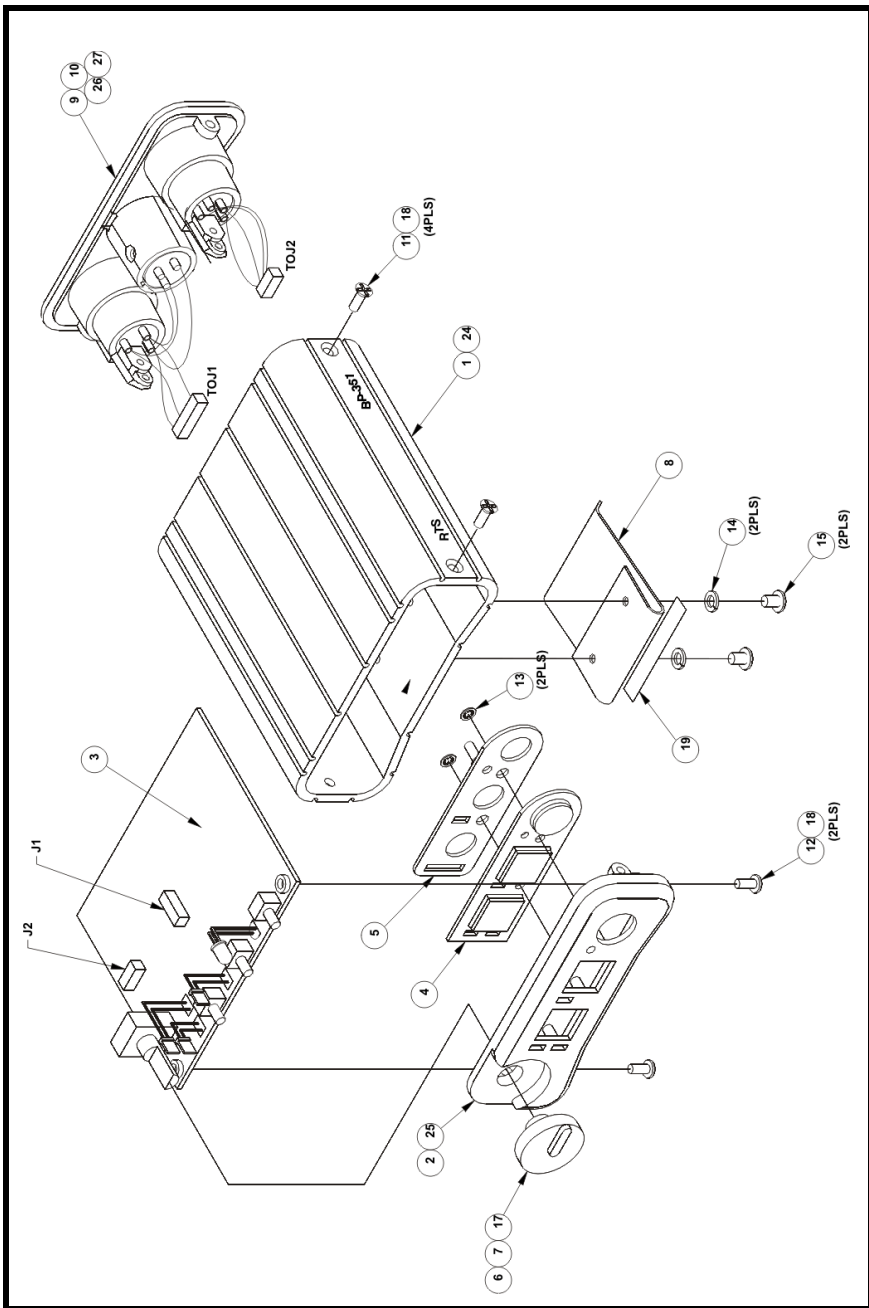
BP-351 Final Assembly 9010-7754-000
